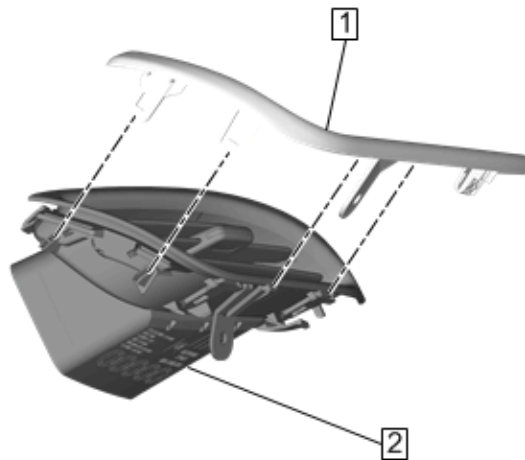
Instrument Panel Outer Air Outlet And Trim Plate Applique
